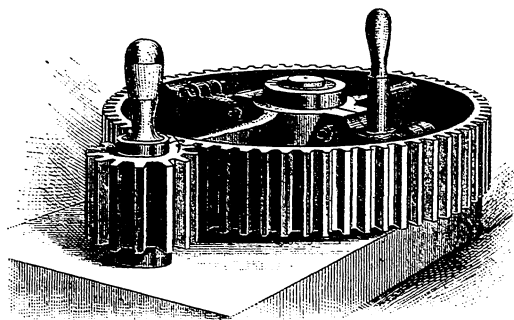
Device for Testing Accuracy of Hot Pressed Steel Pinion.
